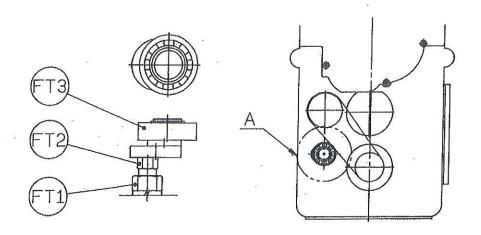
V-Belt Adjustment Of Main : Spindle Automatic Feeding
